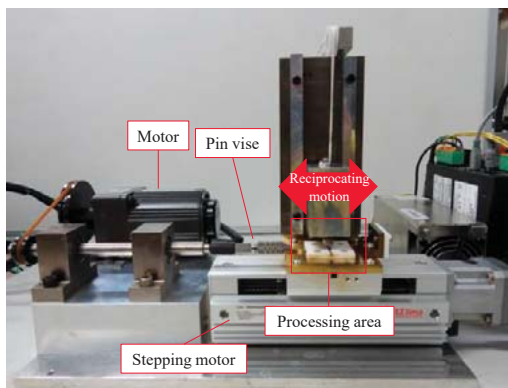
Appearance of a magnetic fluid grinding machine for producing a micro-sized tension test specimen.
